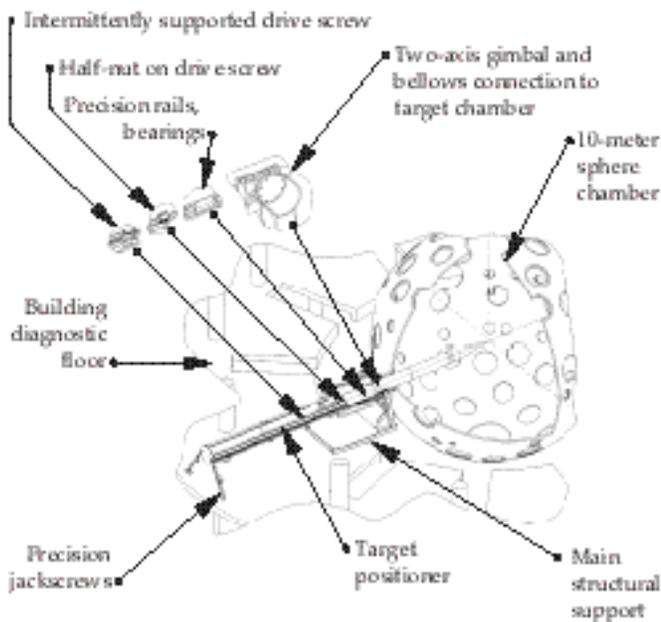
Target positioner design and components. (40-00-1097-2278pb01)
